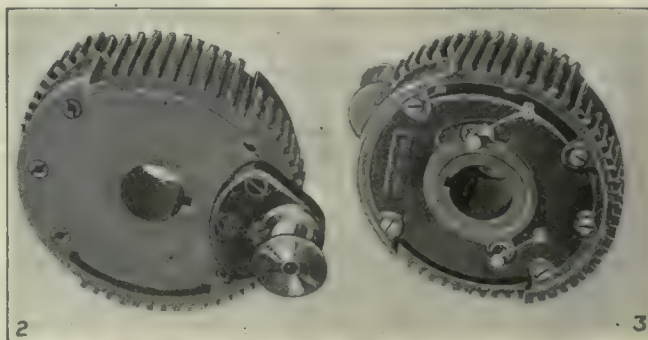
CRANK SIDE OF GEAR. FIG. 3. COVER SIDE OF GEAR
